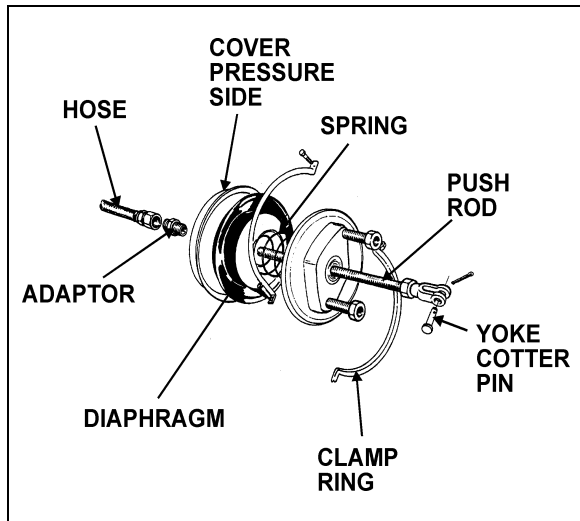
FRONT AXLE BRAKE AIR CHAMBER 12082
